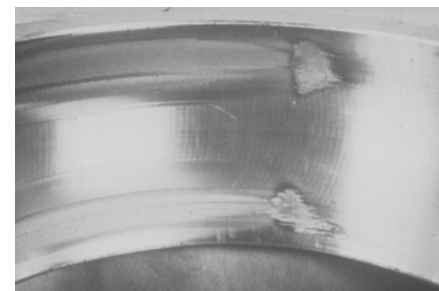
Smearing in beginning of loaded zone in spherical roller bearing
